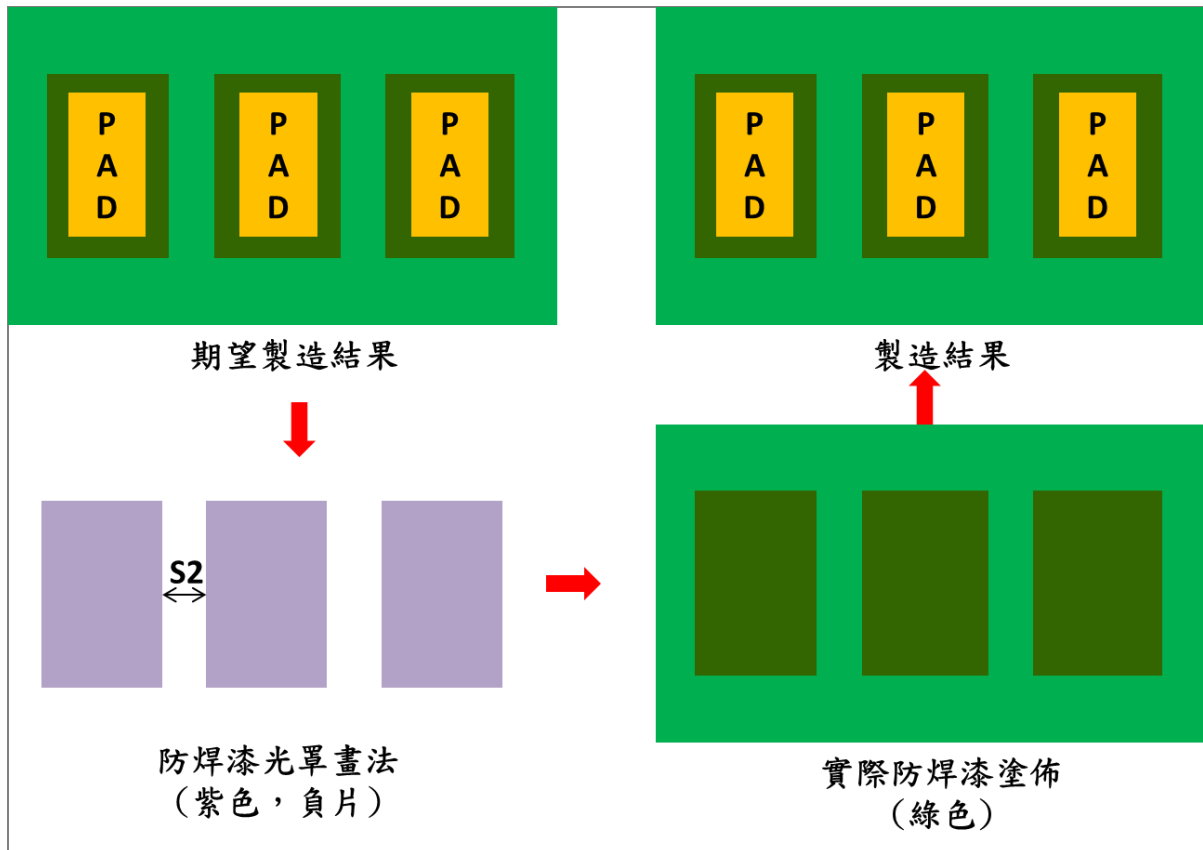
"solder Mask min line width" $S2$ is enough
